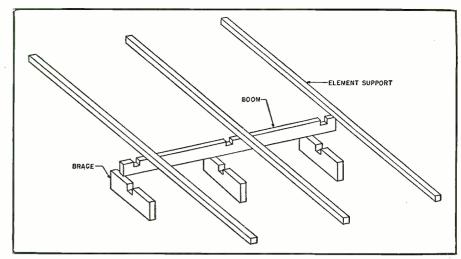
"Exploded" view of the antenna frame showing how parts are assembled.
